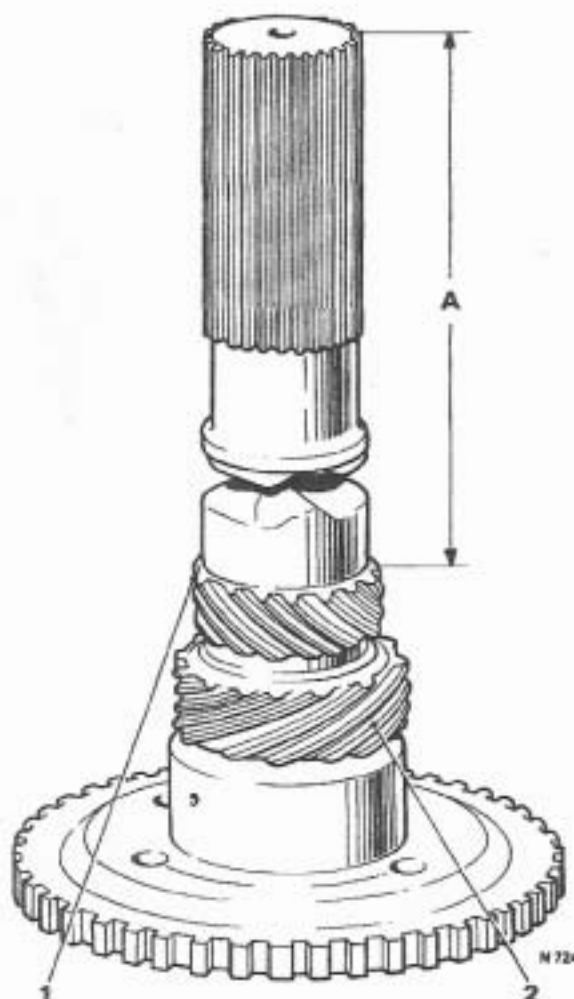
SPEEDOMETER DRIVING GEAR—FITTED
